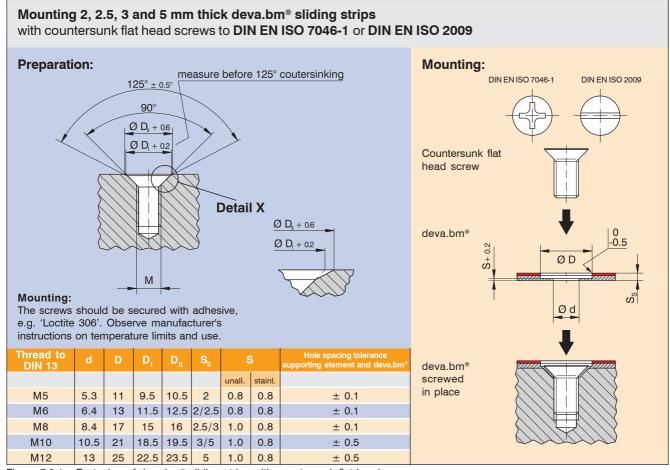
Fastening of deva.bm® sliding strips with countersunk flat head screws
